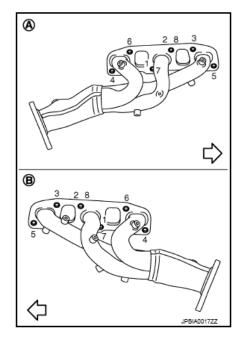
Exhaust Manifold Mounting Nuts Loosening Sequence (Bank 1 And 2) Courtesy of NISSAN MOTOR CO., U.S.A.
